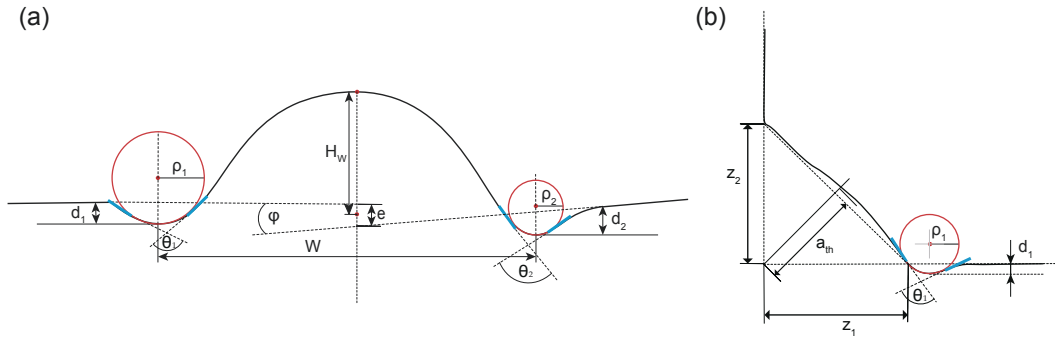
Local weld geometry of butt-welded joints including definition of axial (e) and angular misalignment φ (a) and fillet-welded joints (b), adopted from Braun et al. (2020f)
